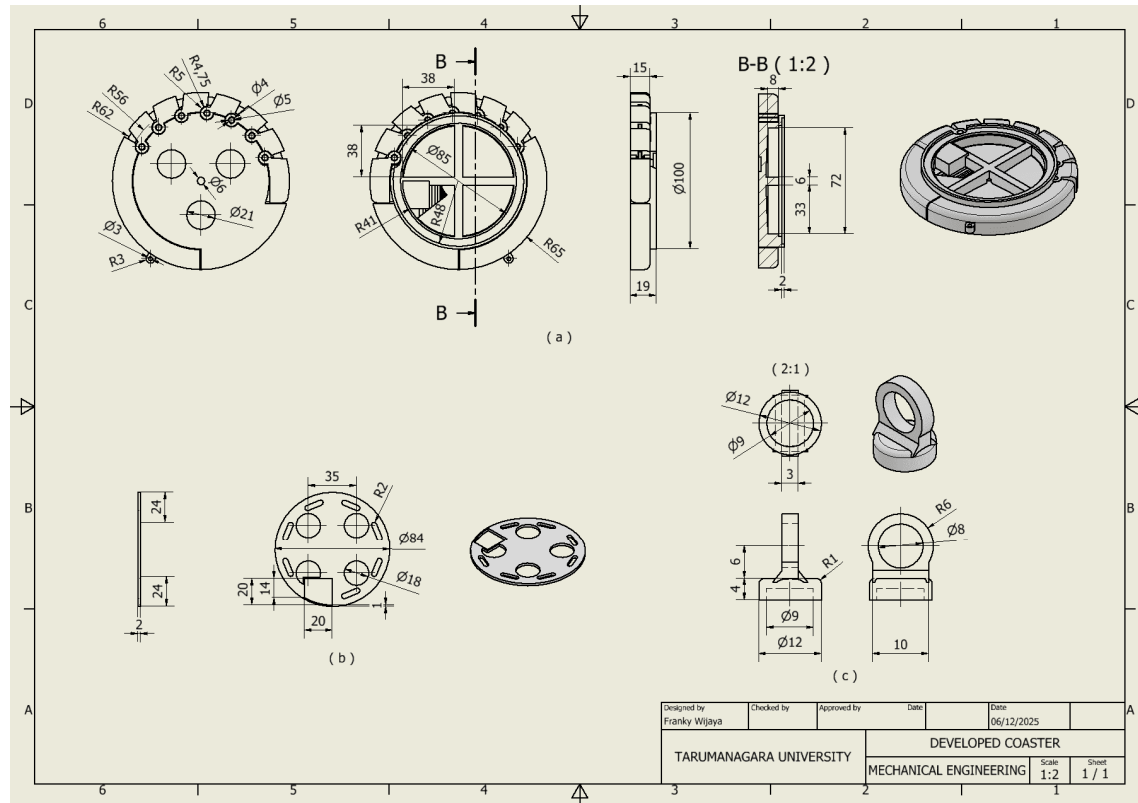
Engineering drawings for (a) developed coaster, (b) top of the coaster and (c) straw holder
